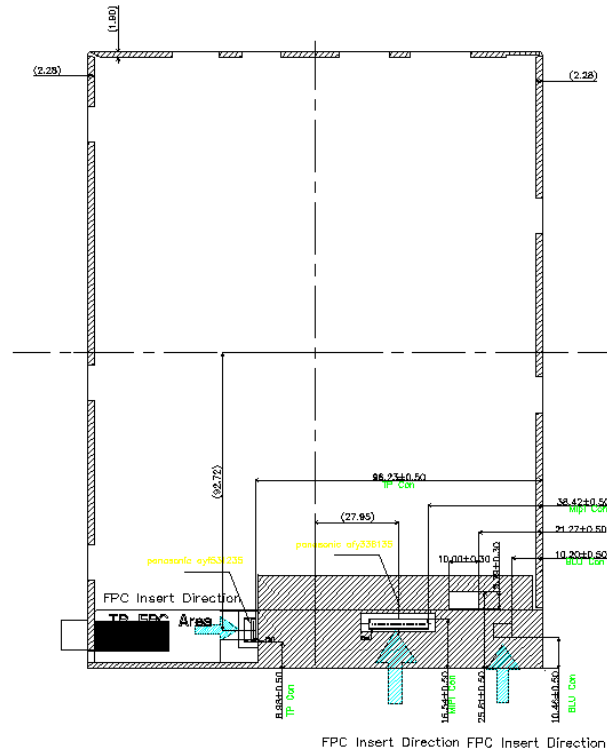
TFT-LCD Module Outline Dimensions (Rear view)
